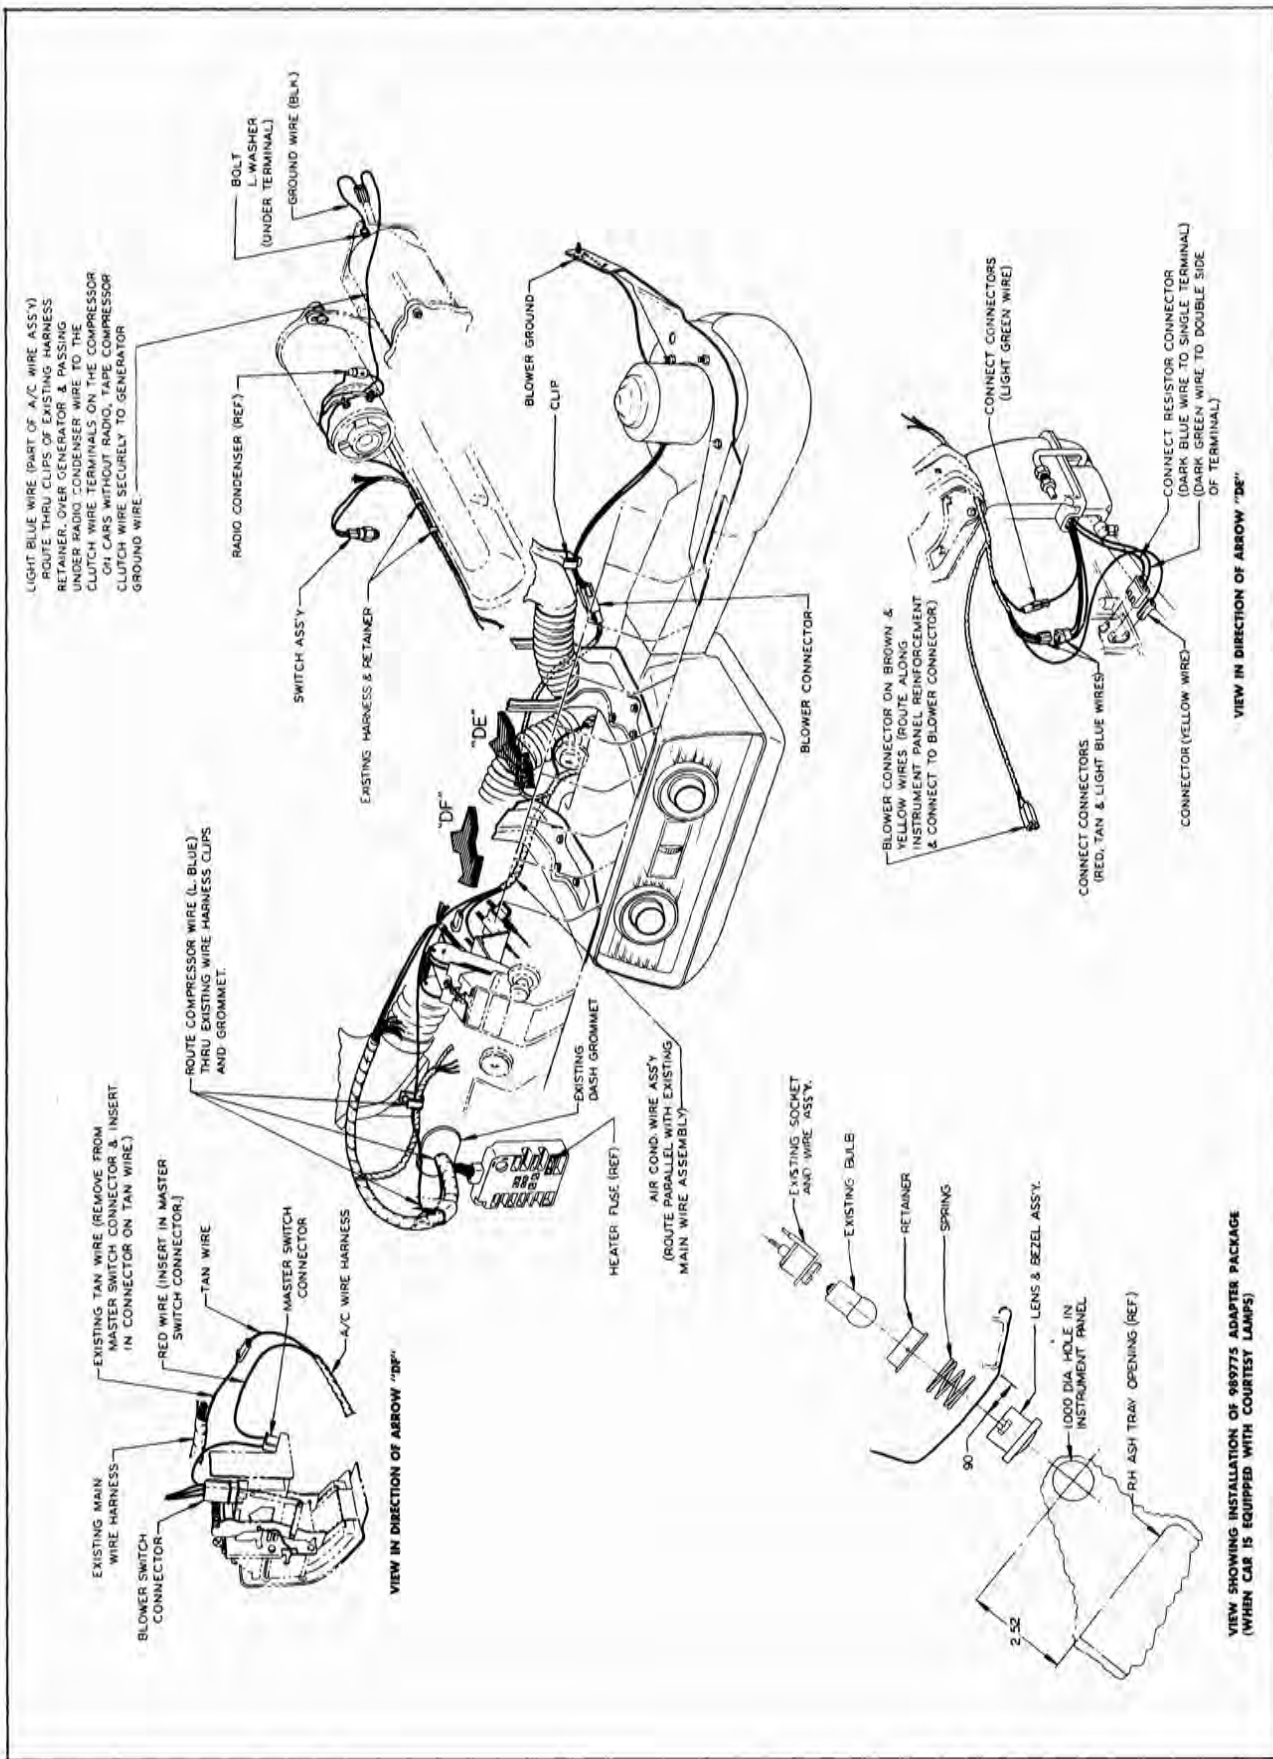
Reference Illustration—Pontiac Cool Pack Electrical Parts
